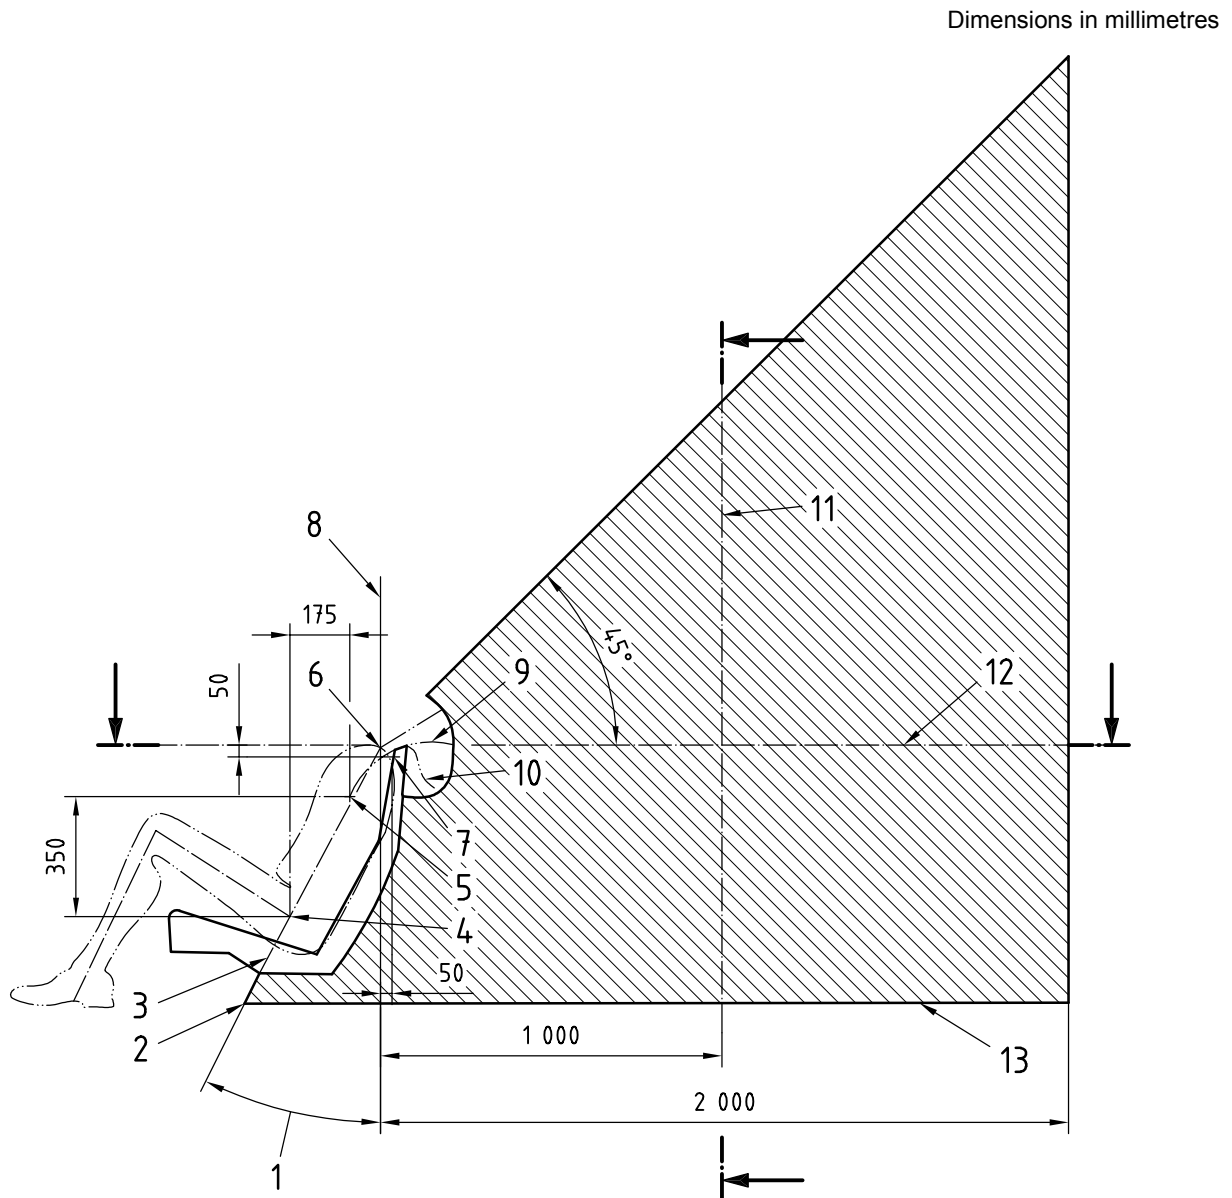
Top tether anchorage location — ISOFIX zone — Side view
